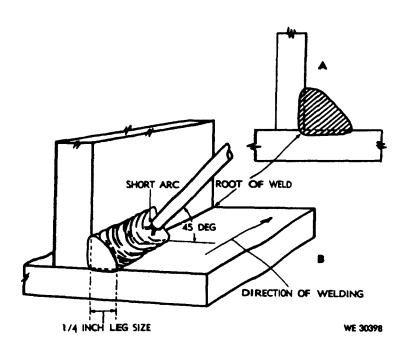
Position of electrode and fusion area of fillet weld on the joint.
